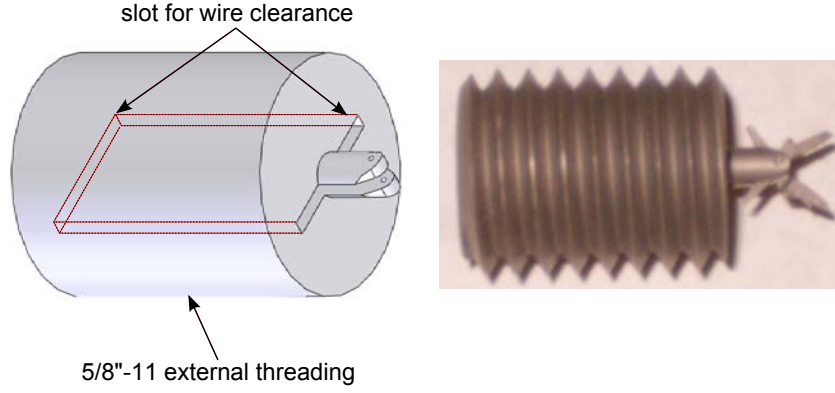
Testing tool mount. CAD model (left) and photograph of manufactured testing mount (right) with external threading for fixation and clearance slot for actuating wires.
